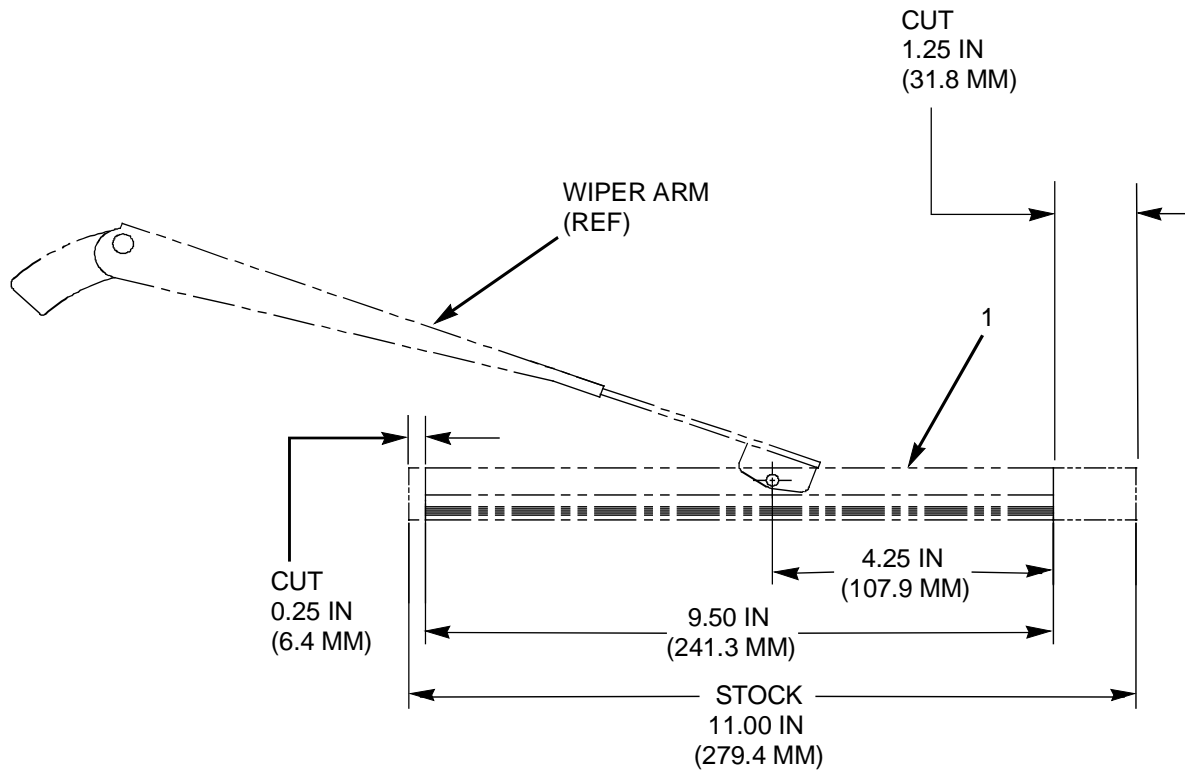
Windshield Wiper Blade Modification and Installation (Sheet 1 of 2) (2 and 4 Door)
